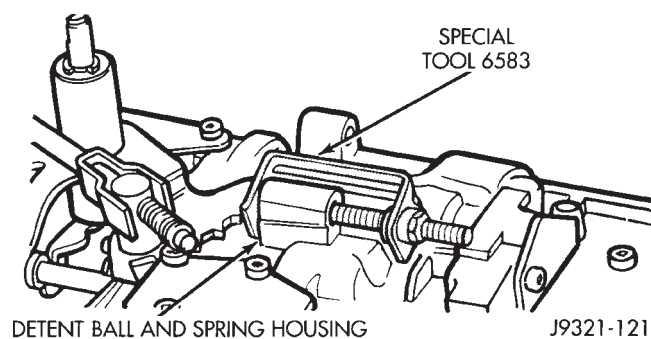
Securing Detent Ball And Spring With Retainer Tool
